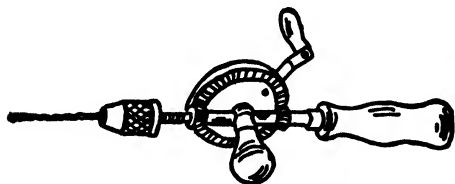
The hand drill is one of the most useful tools for drilling small holes, either in metal or in wood.
